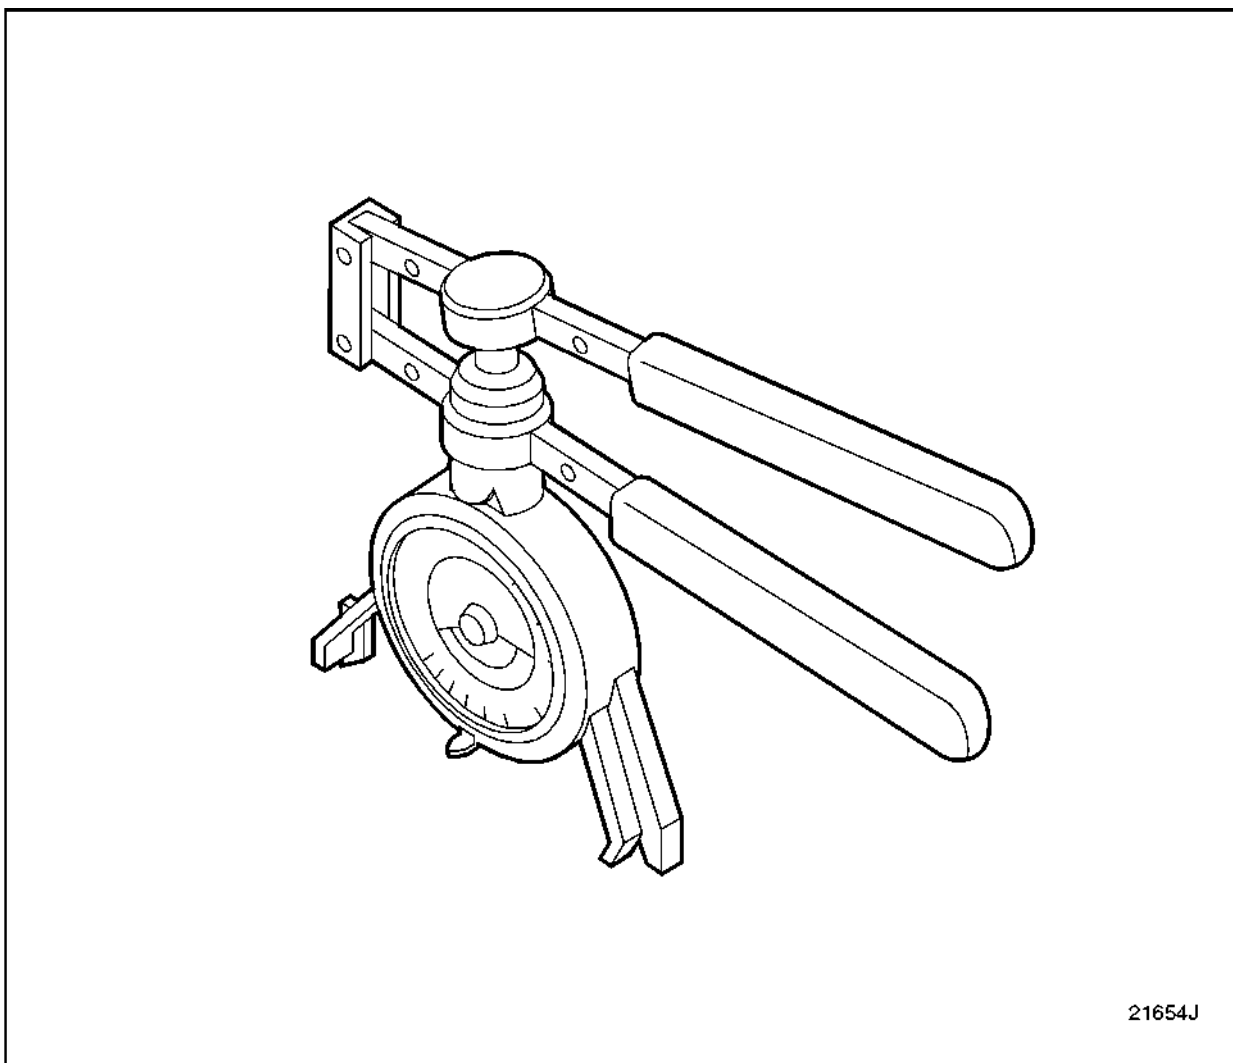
Belt Tension Gauge (275-475 LBS),J 39966
